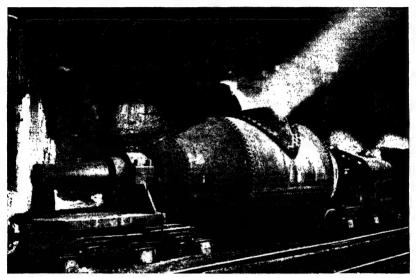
Hot-metal car being filled with molten pig iron from a blast furnace. (Courtesy of the Bethlehem Steel Co.)
